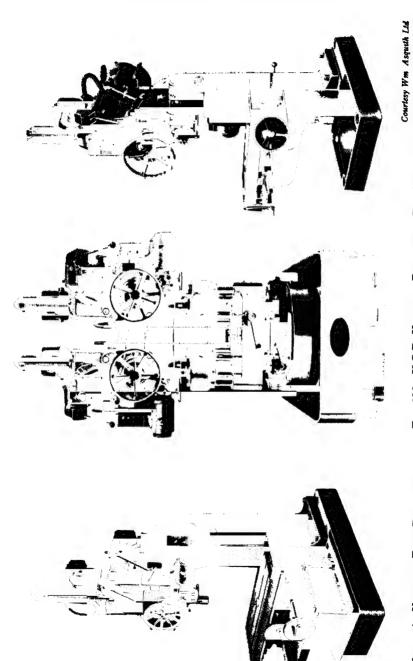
U G D VERTICAL DRILLING MACHINE WITH CIRCULAR TABLE
